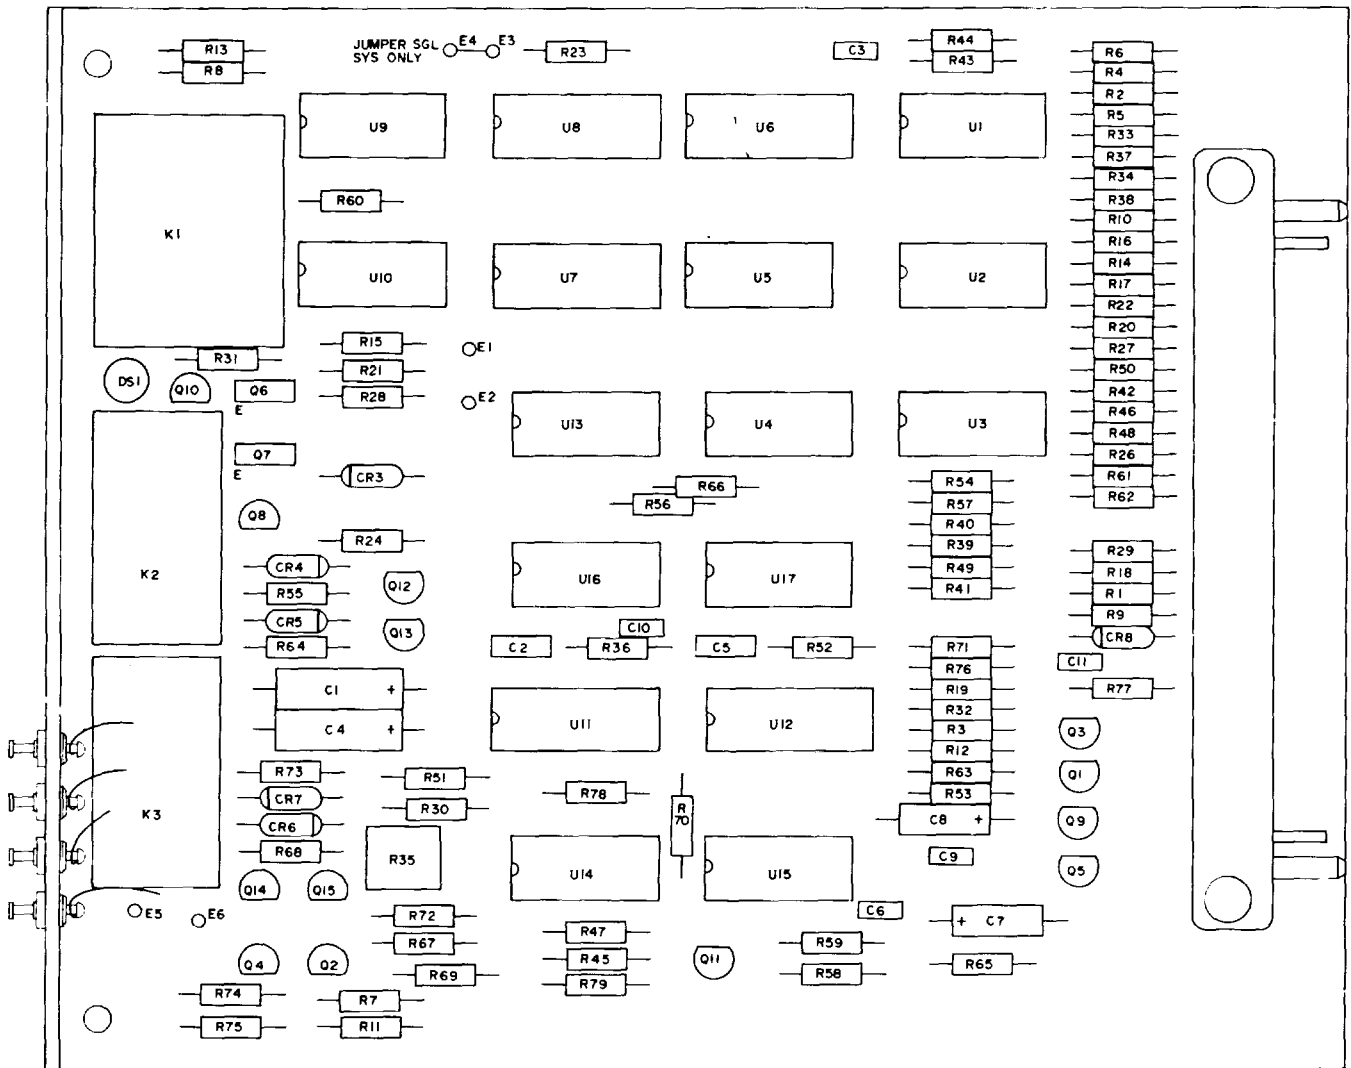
Alarm and Transfer Circuit Card Assembly, 1A2A2
